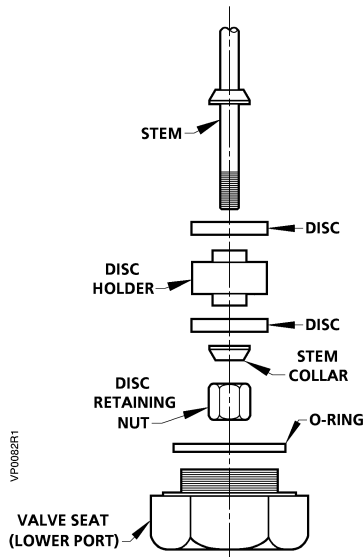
Valve Disc Replacement for VP 656 Powermite Water Screwed End Valve.
